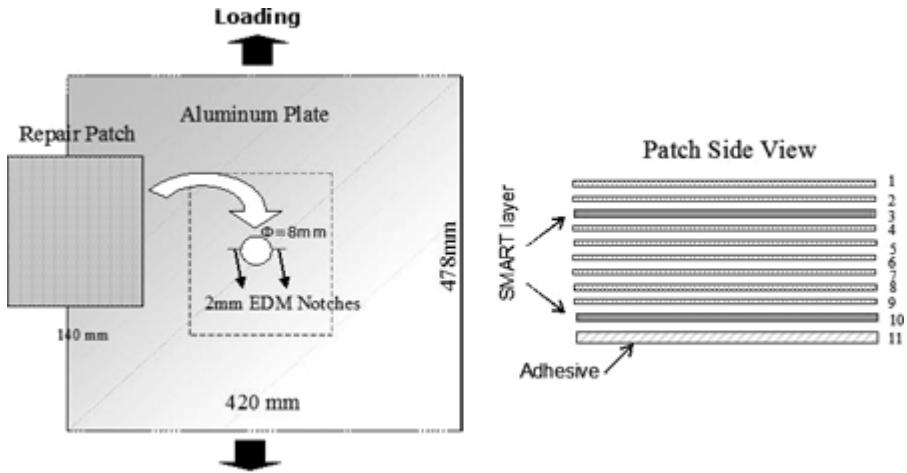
Bonded patch specimen assembly (SMART patch 2).
